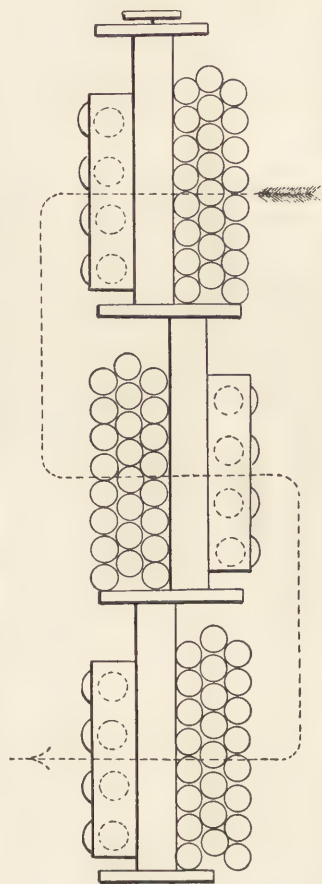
PLAN OF DRAWING FRAMES SHOWING POSITION OF CANS WITH CROSSED HEADS.
